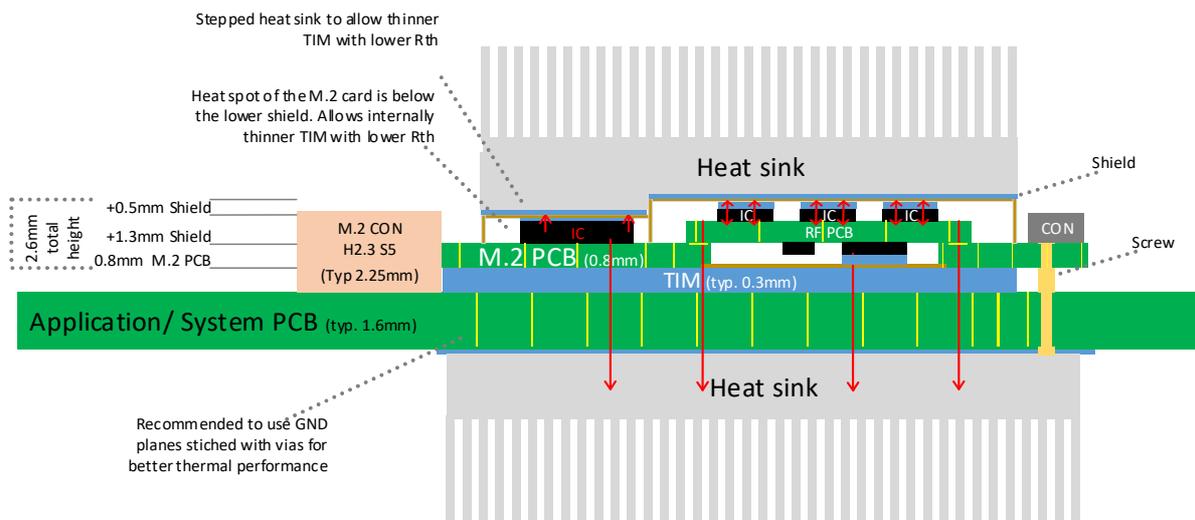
Option 1 - Heat sink on top of stepped shielding and bottom of application PCB
